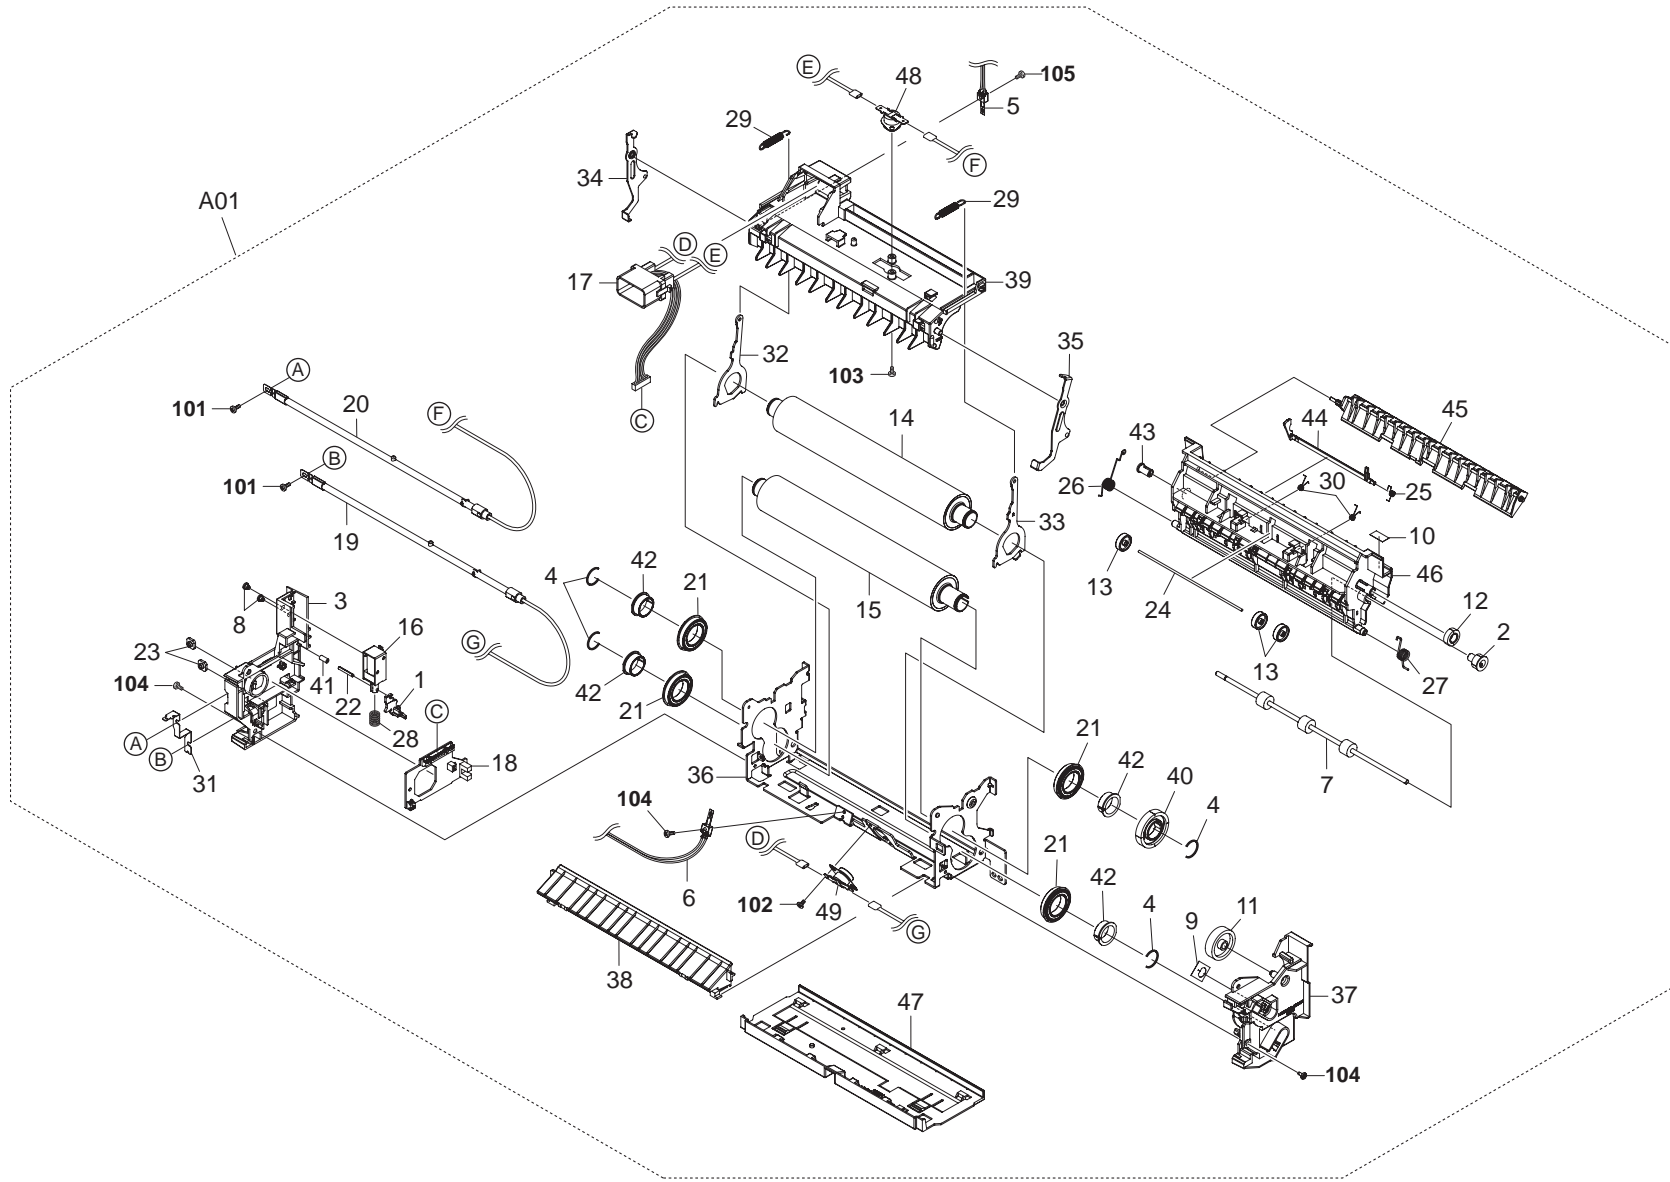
Fuser Unit (16/17ppm EUR/USA)
